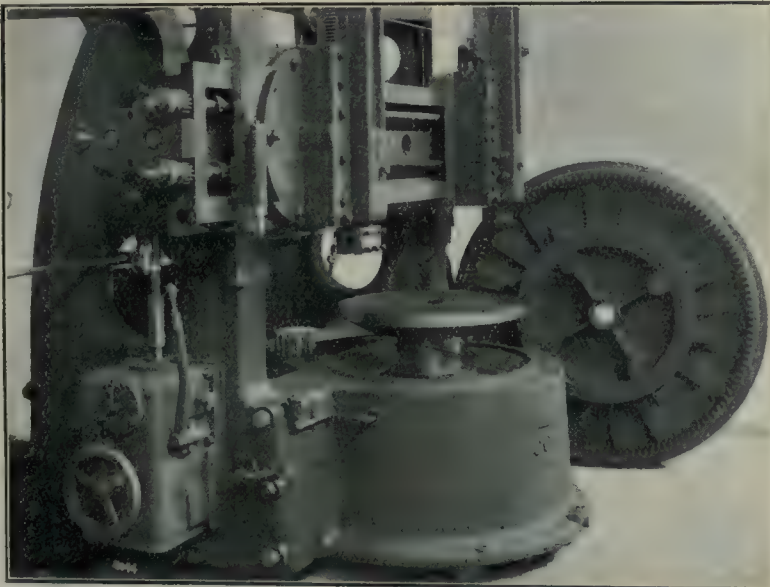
Detail of Table Spindle Bearing and Internal Drive as Used on 60 and 72 Inch New Model Mills.
